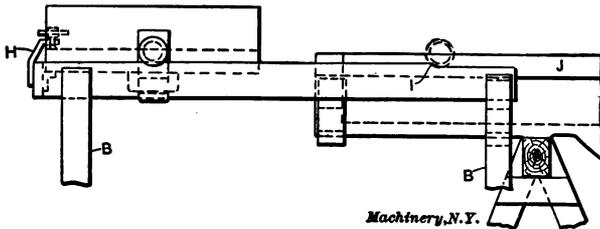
Elevation of Device used when fitting a Saddle to a Cross-rail, which enables the Former to be removed from the Latter and scraped, without the Use of a Crane
